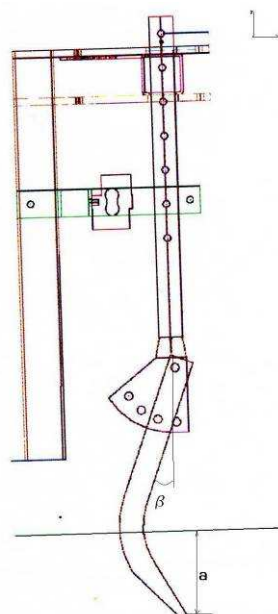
Tool position in tool-holder assembly for one of the measurements / Poziția sculei în ansamblul port-scula la una din măsurători
